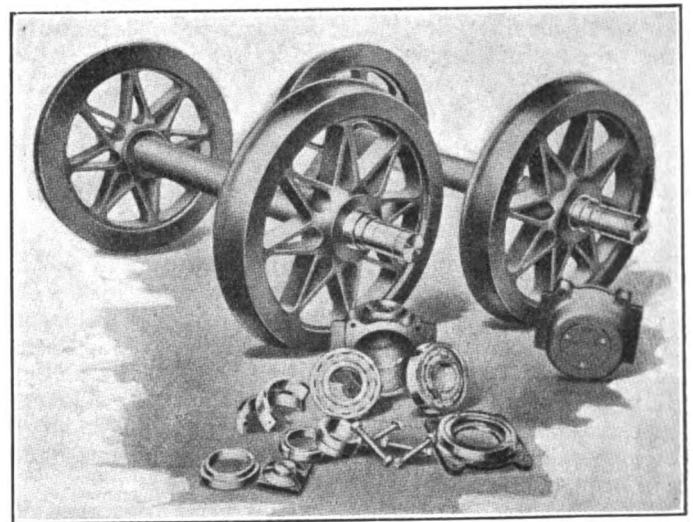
Drawing showing the application of disk bearings to a railway car journal
